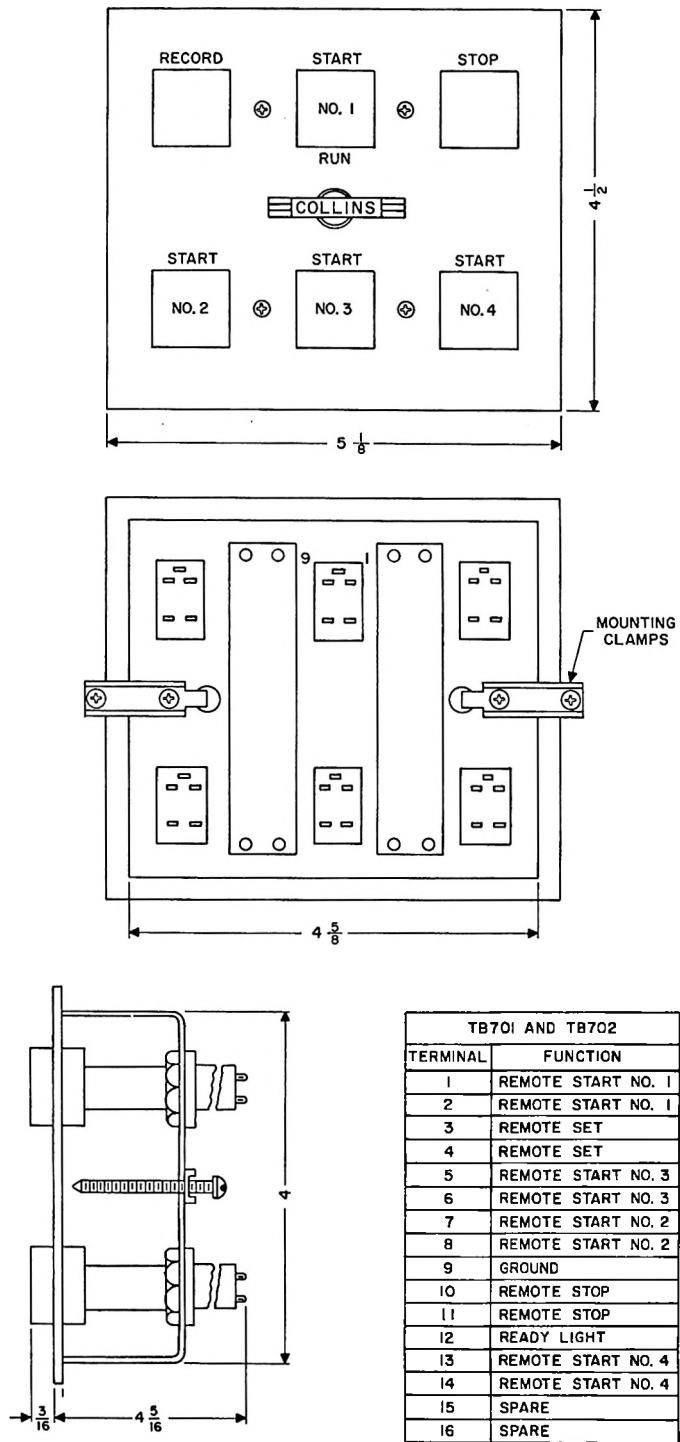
313T-4 Remote Control Switching Unit, Outline and Mounting Dimensions
